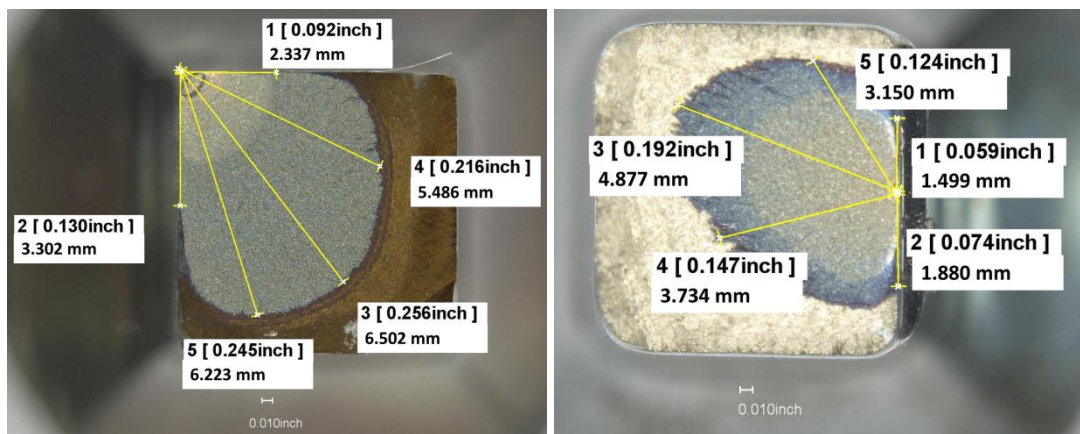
Examples of fracture surface which display evidence of crack tunneling
